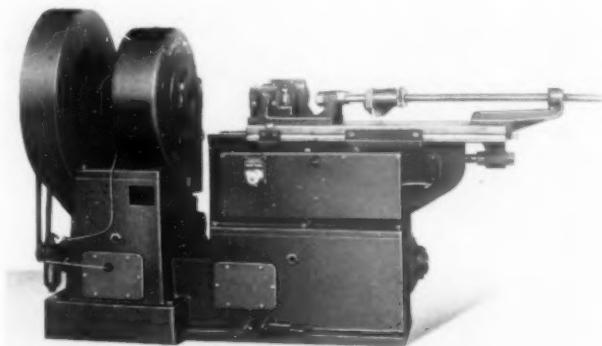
Modern rotary swaging machine, with hydraulic feed and automatic, hydraulically operated vise. (Photo by courtesy of Langelier Mfg. Co., Providence, R.I.)
